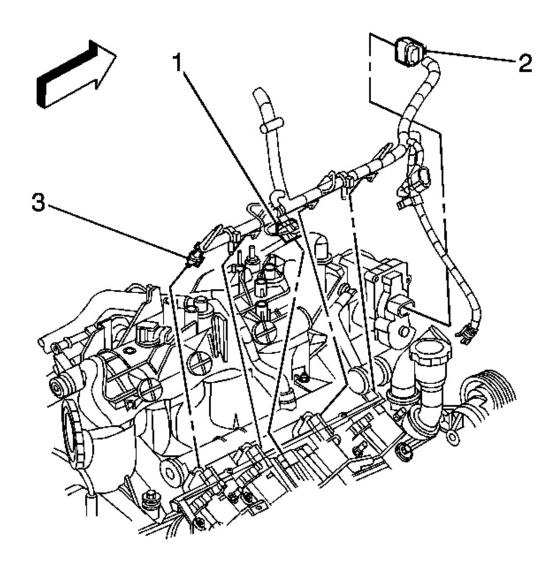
Locating Electrical Components At Top Of Engine Courtesy of GENERAL MOTORS CORP.
